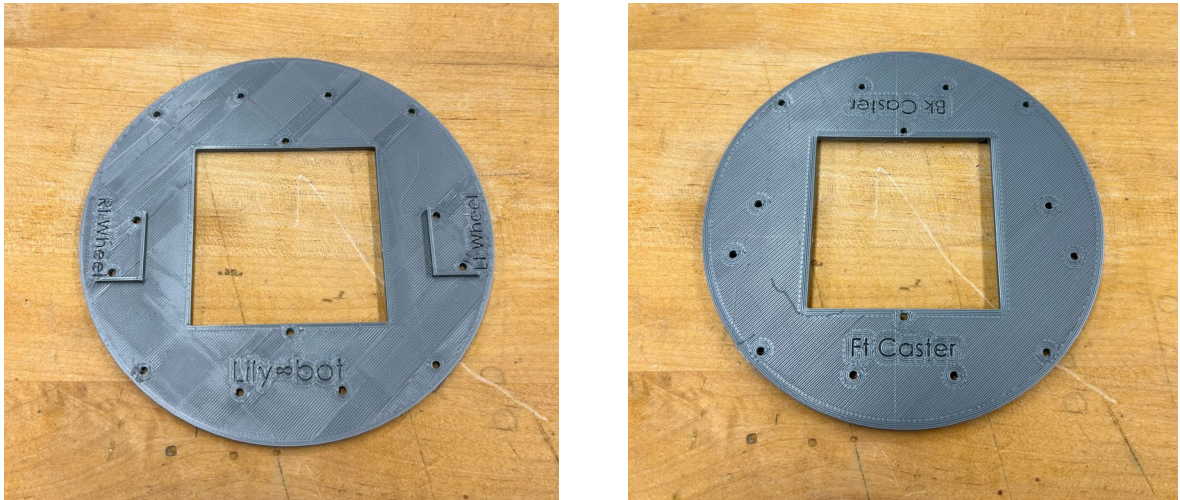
Top (left) and bottom (right) faces of the bottom chassis
